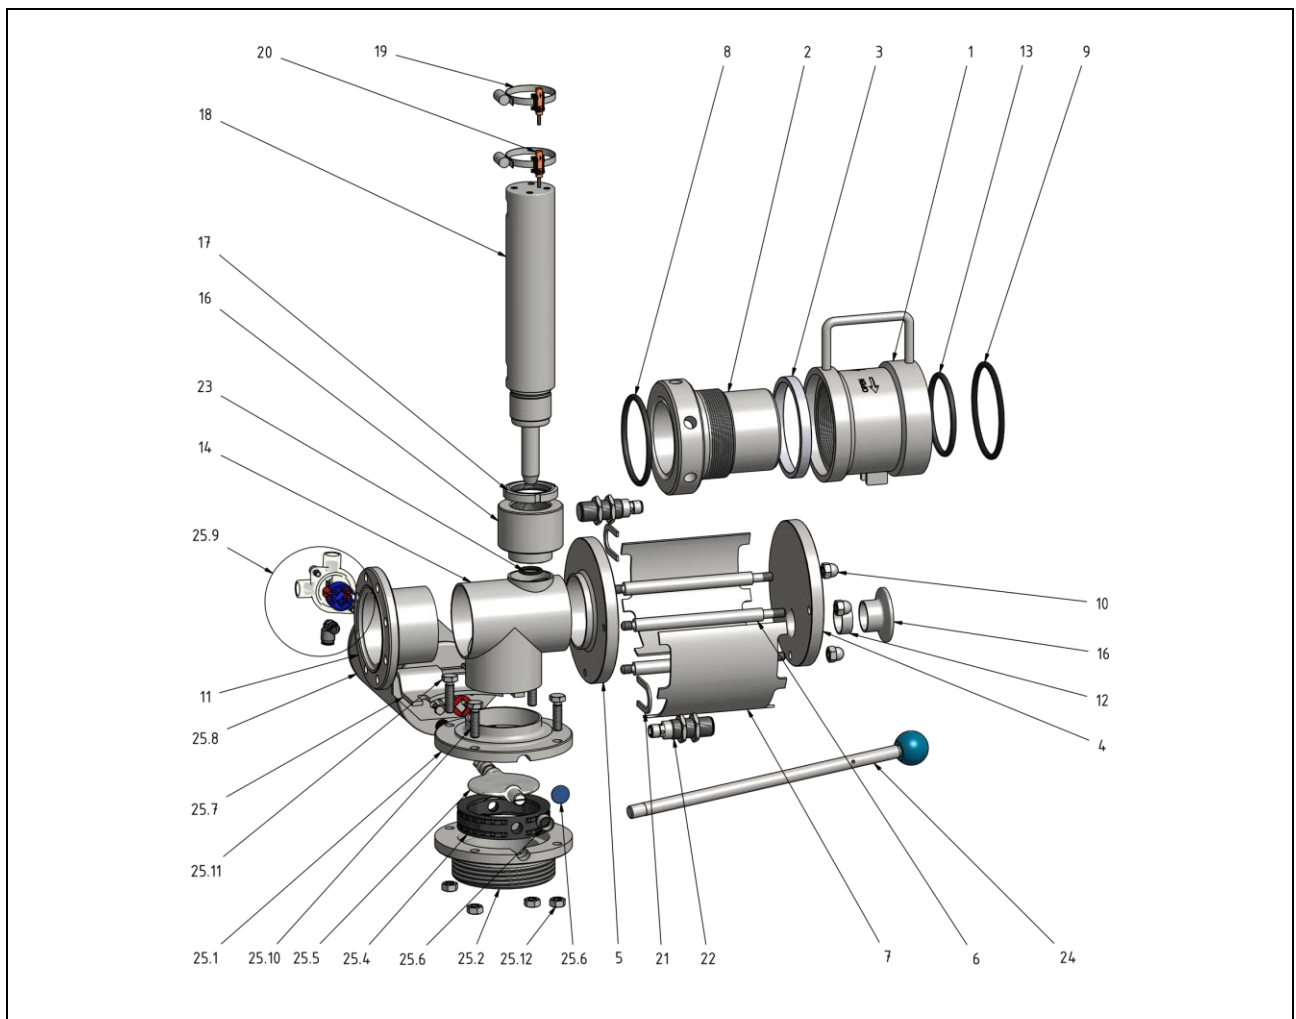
Structure of Plug-in Chamber with Stopper and Butterfly Valve
